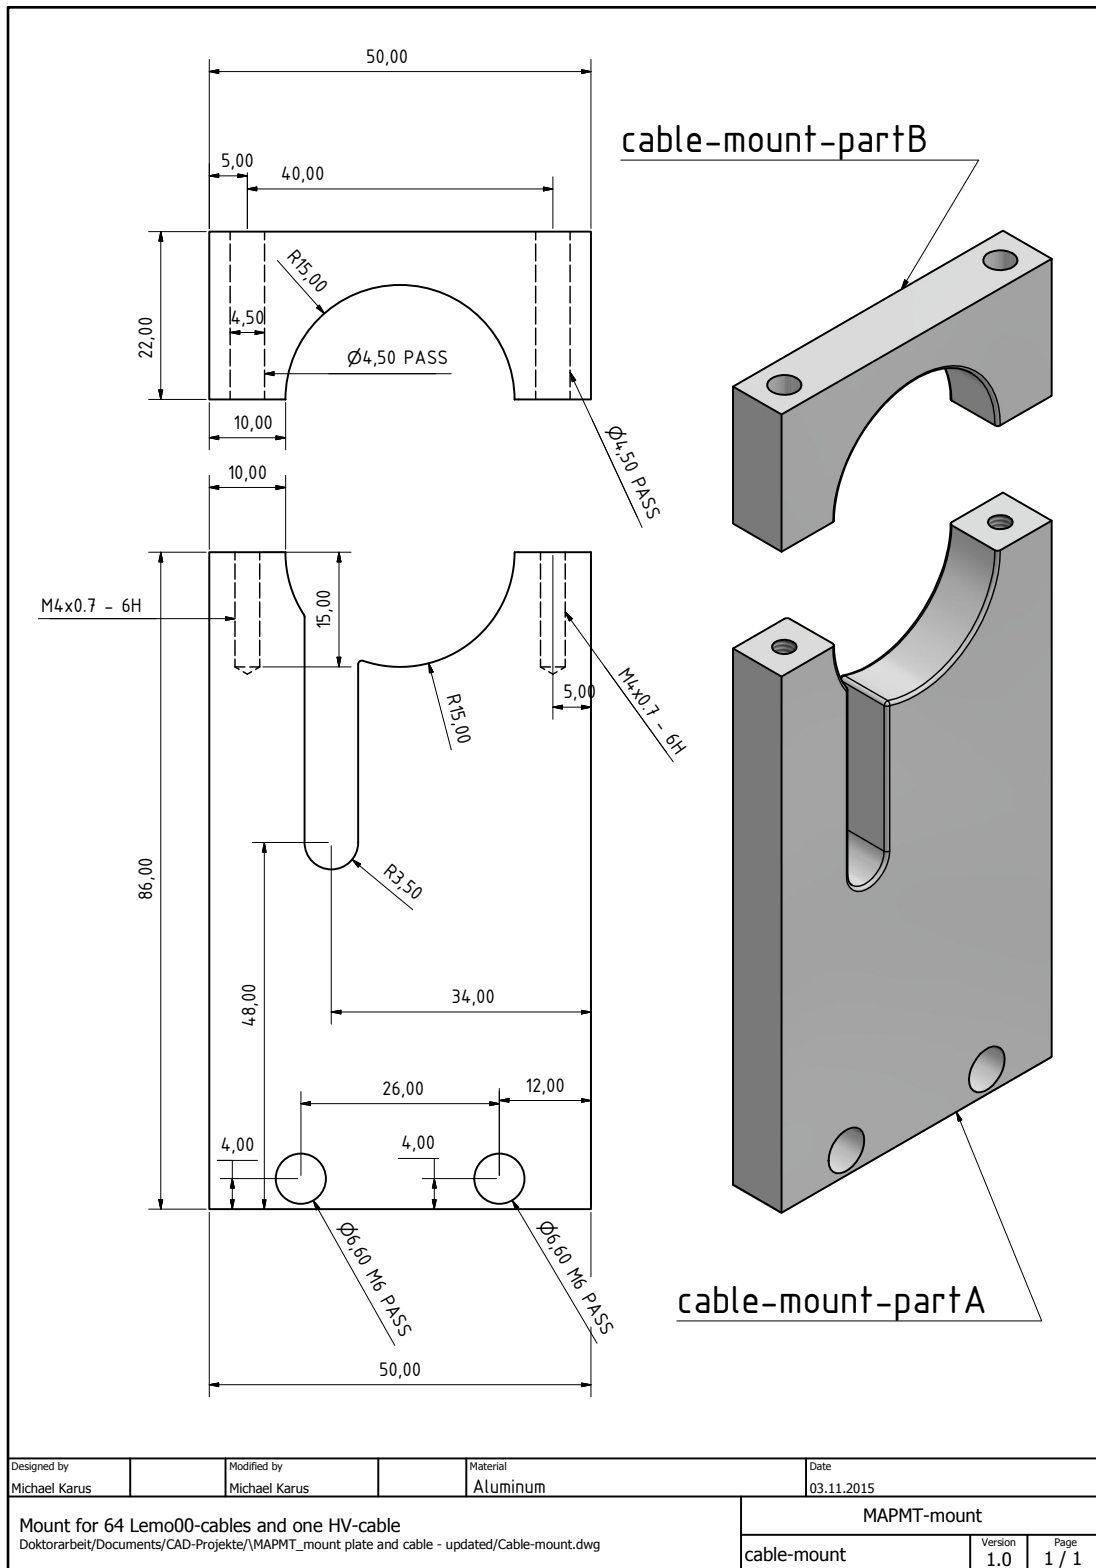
Construction sheet of the cable-mount for the MAPMT-board.
